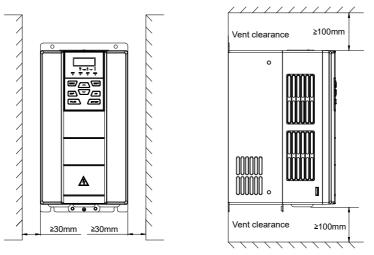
Minimum mounting clearances of GK820-4T22B and below
